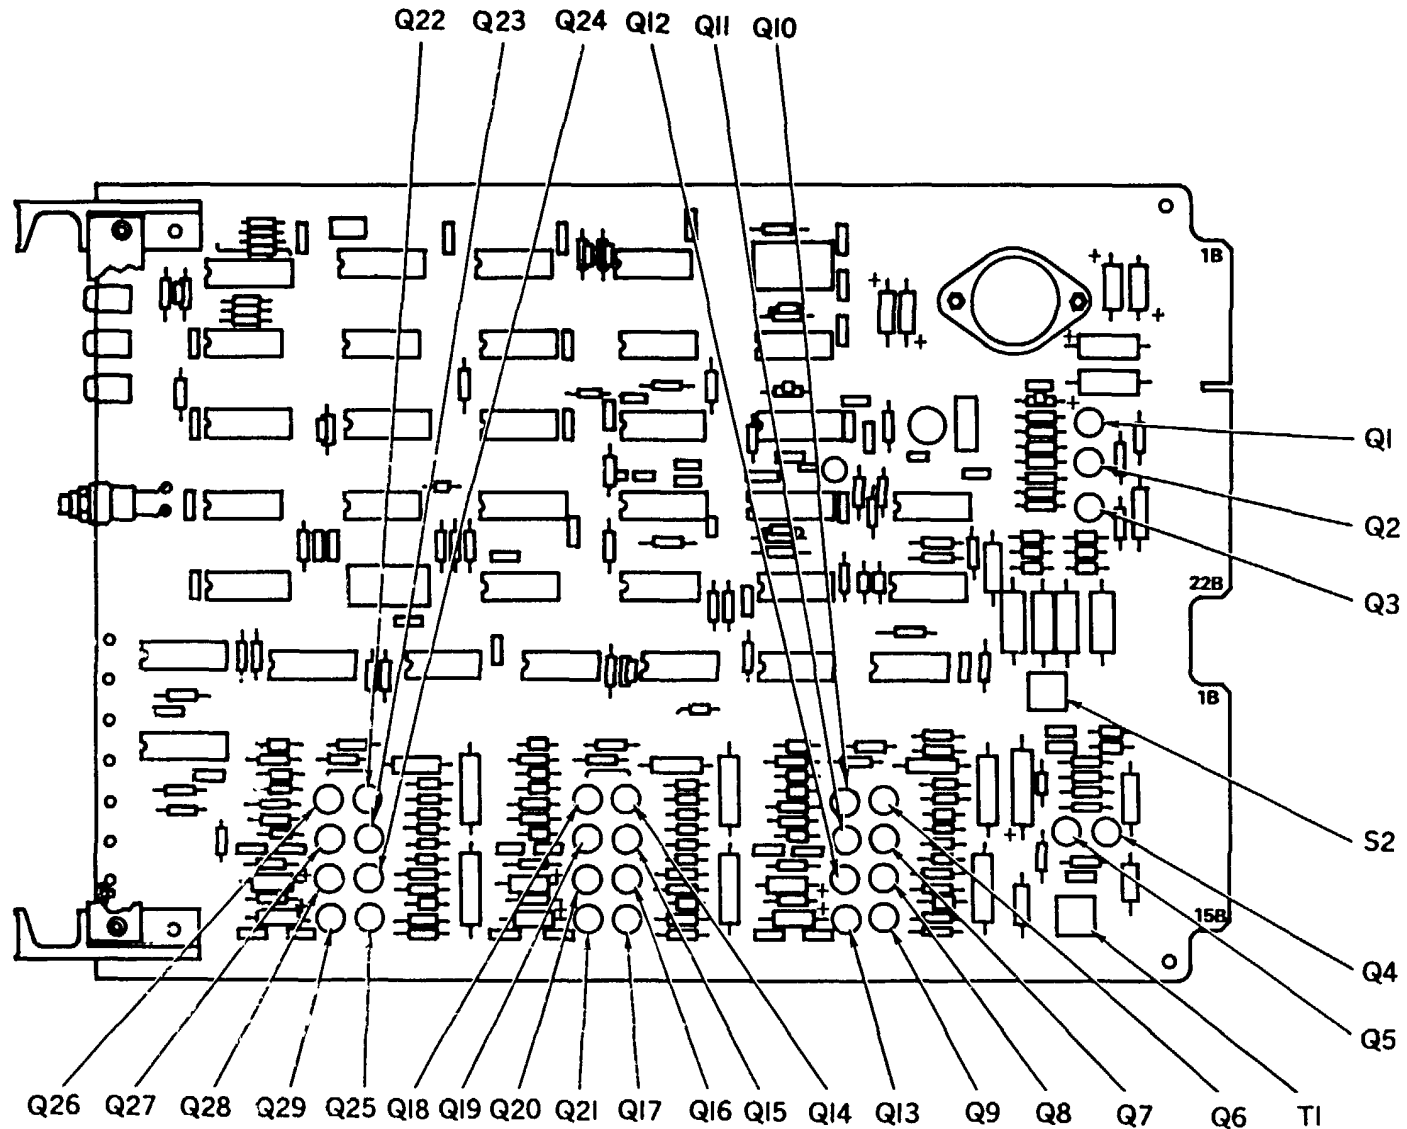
DRIVER unit parts location diagram (sheet 5 of 14) DVR02.
